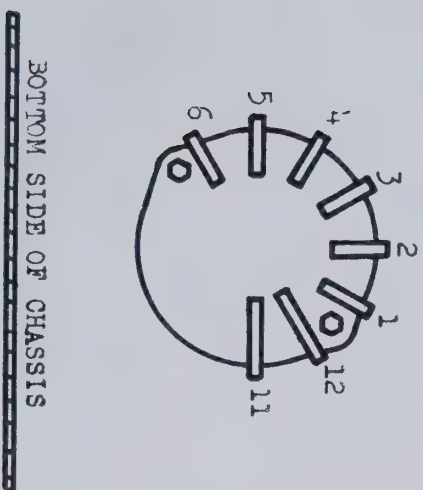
D. SW6, COUPLING SWITCH, REAR VIEW. BOTTOM SIDE OF CHASSIS UP
